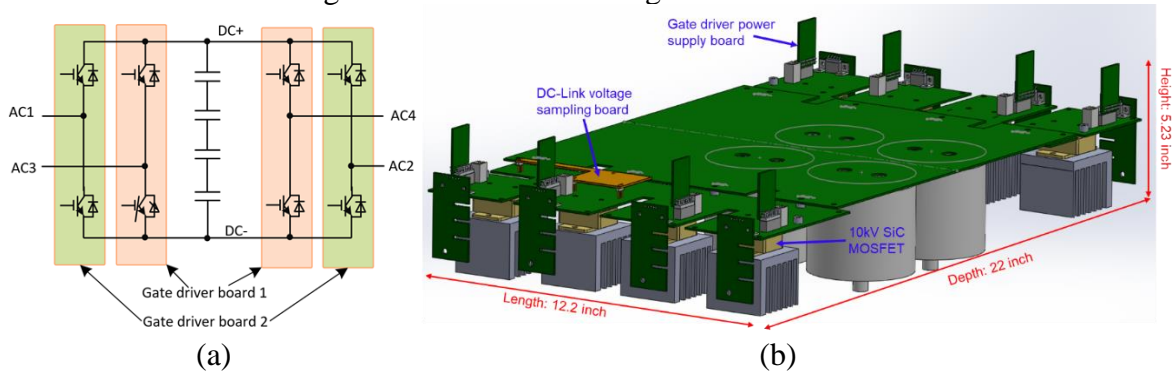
MV Power module: (a) schematics, (b) physical drawing
